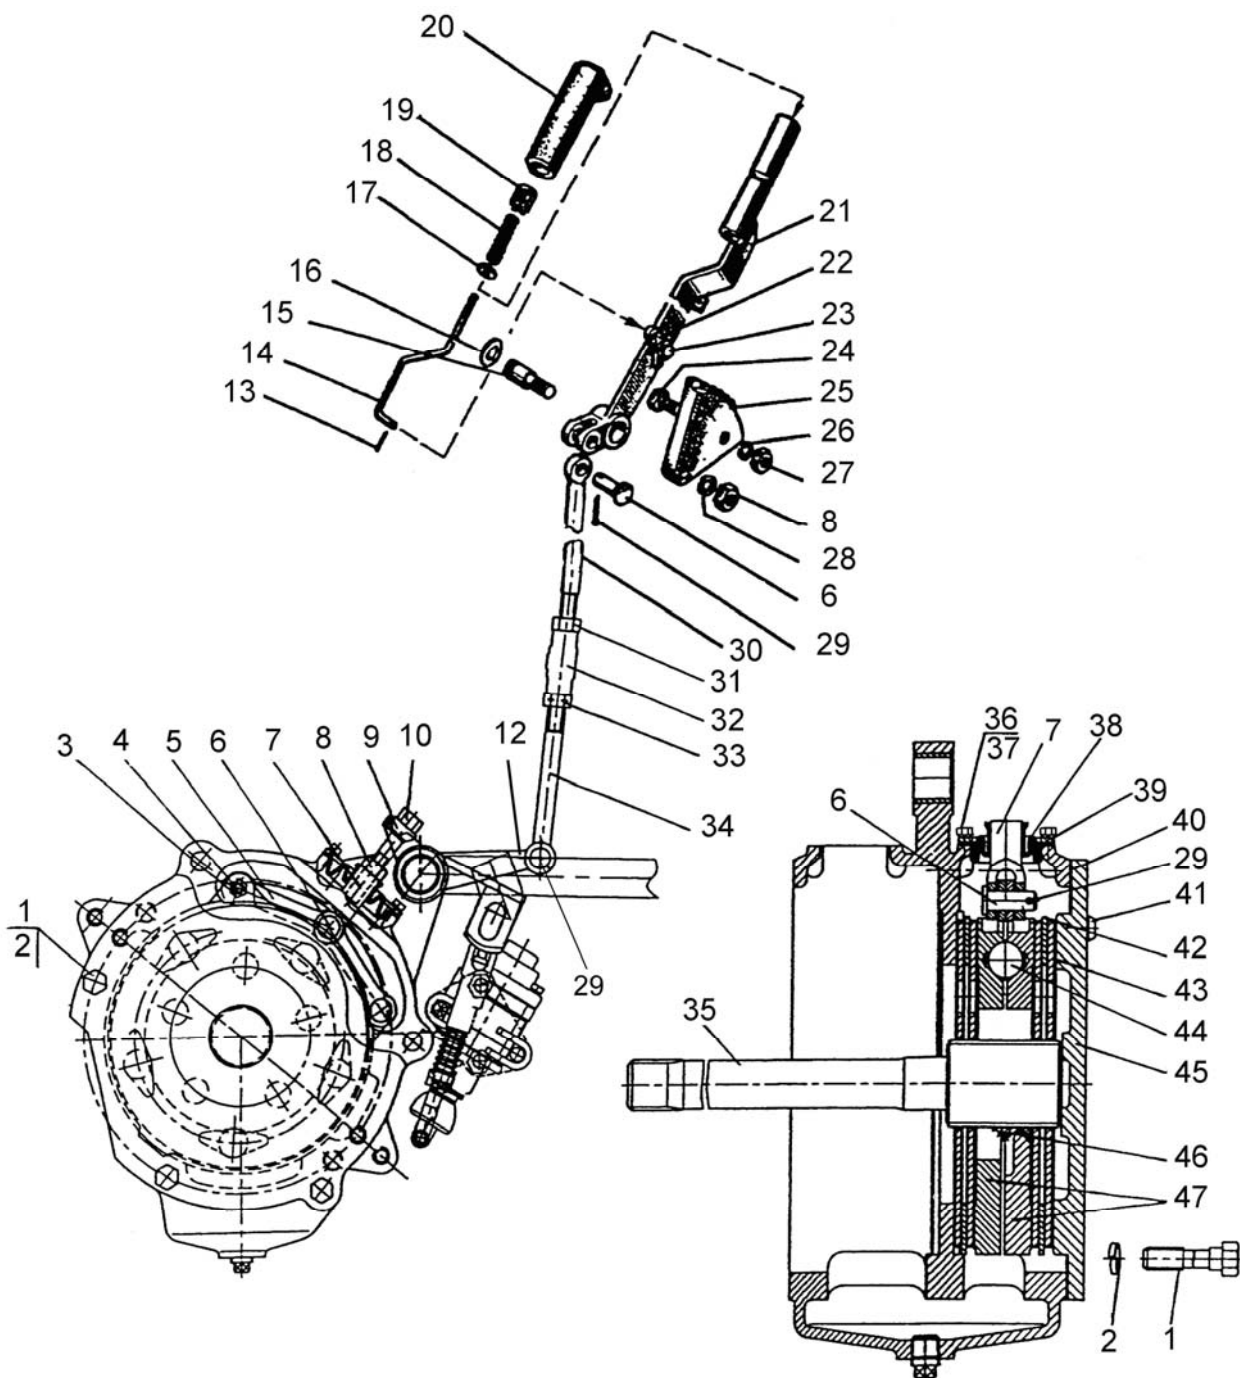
Parking brake. Parking brake control (for "wet" brakes)
